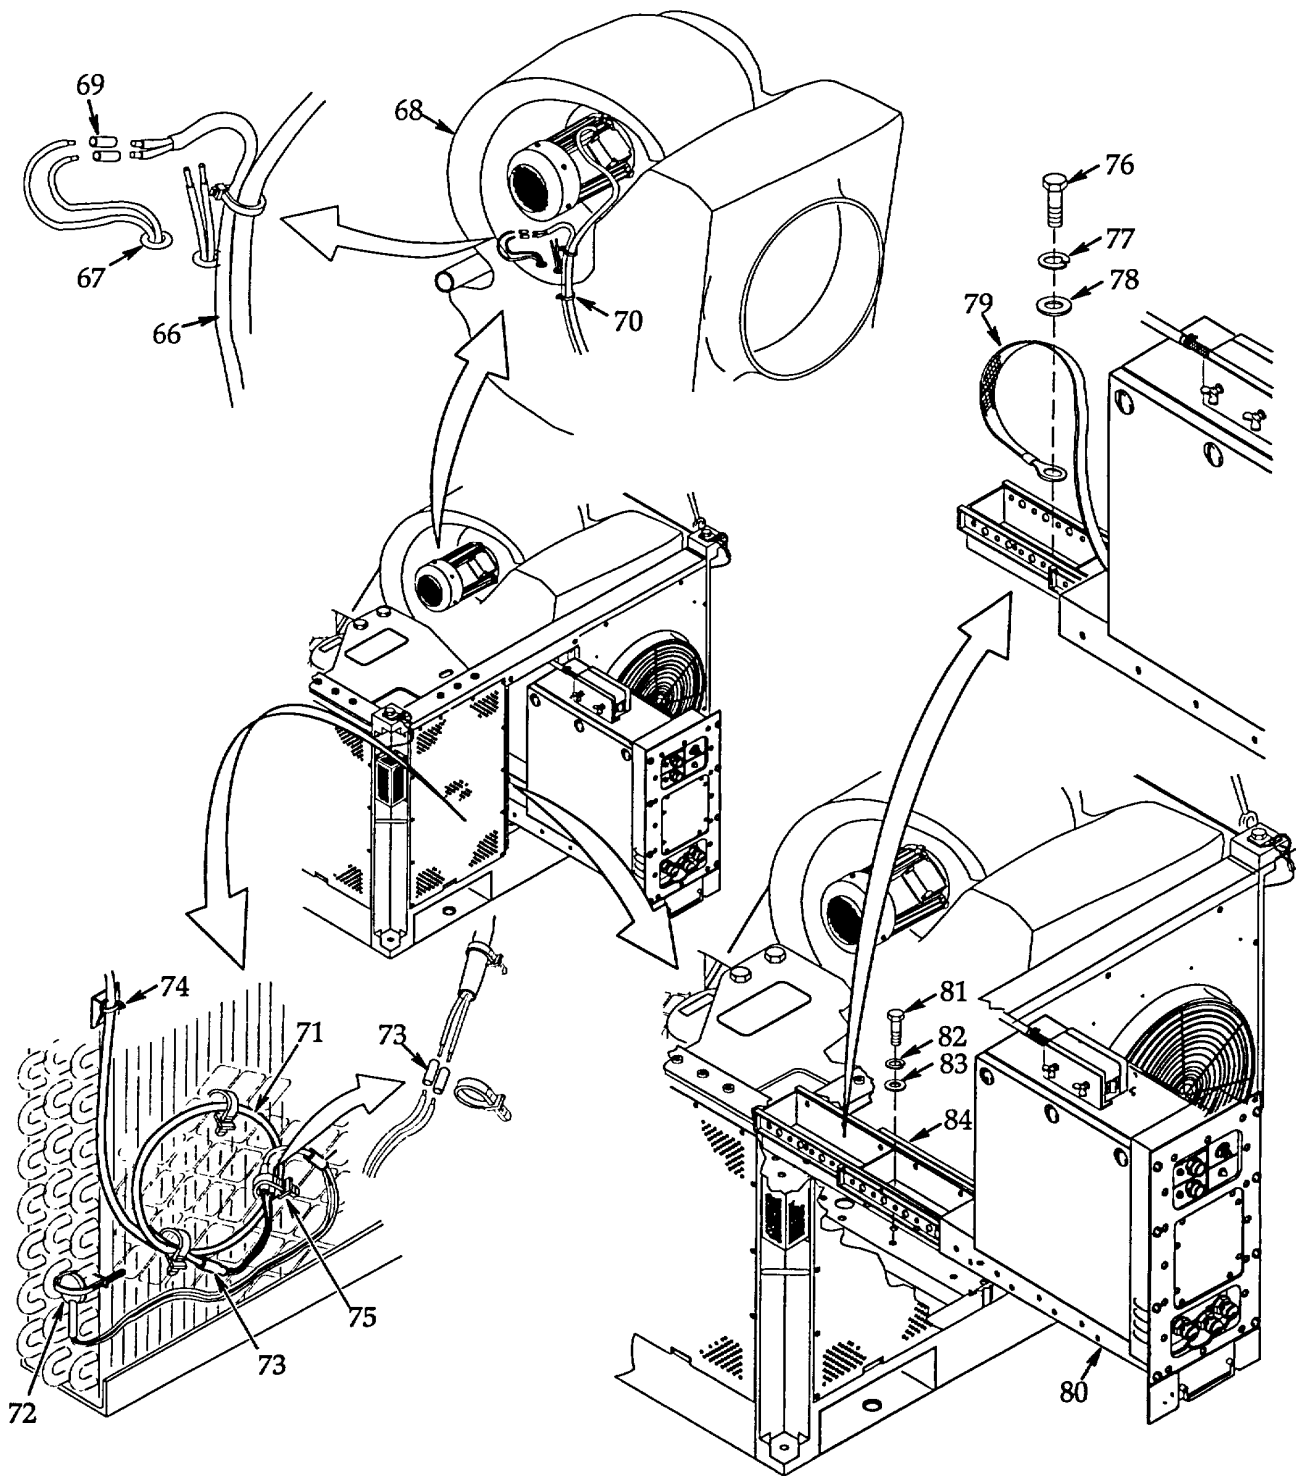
Electrical Assembly (Sheet 2 of 2).
